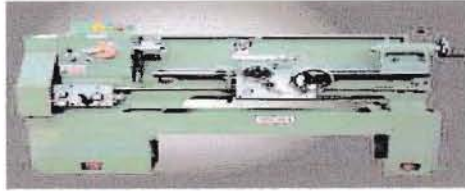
Lathe machine (arcticboy.arcticboy.com)
